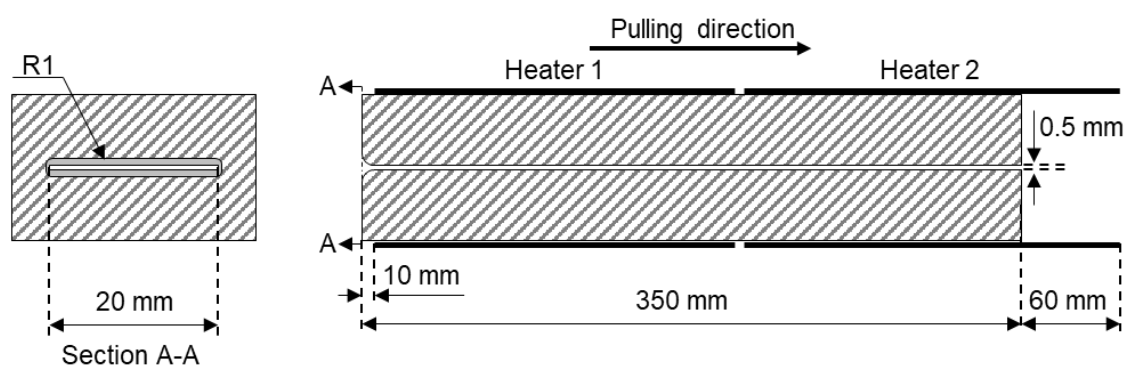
Schematic of the cross-section and the dimensions of the pultrusion die used for the pultrusion experiments.
